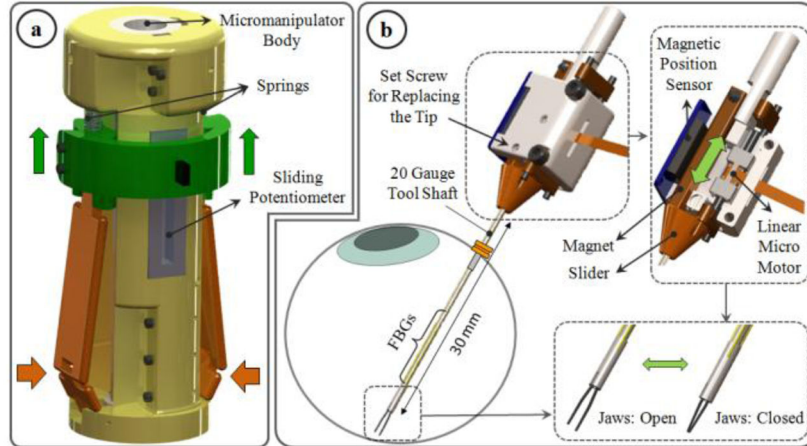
Design of force-sensing micro-forceps for handheld micromanipulators: (a) handle mechanism (b) motorized force-sensing tip with replacable jaws. The tool can be inserted through a 20 Ga trocar into the eye. Squeezing the handle mechanism from the sides drives the motor and pushes the slide assembly forward, and thus closes the grasper jaws.
